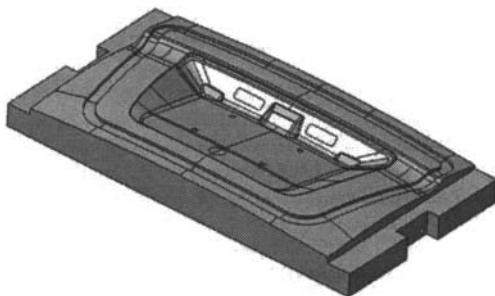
Geometry of the die. Chamber is shown in Figure 7b.
